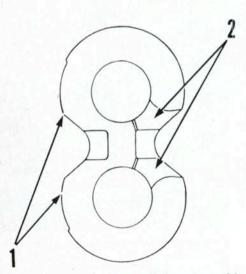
Make certain that relief groove side (1) of bearings is toward outlet side of pump and that recess (2) in each bearing is against face of pump gears.
